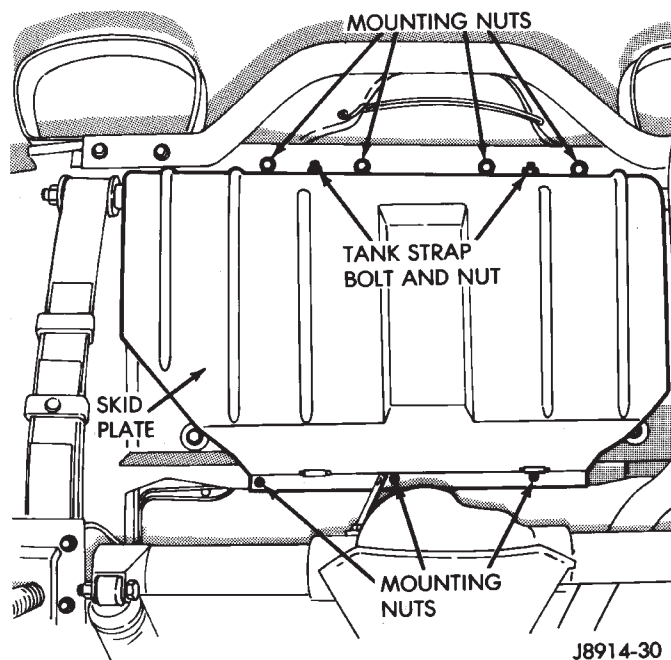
Fuel Tank—Remove/Install—YJ Models
